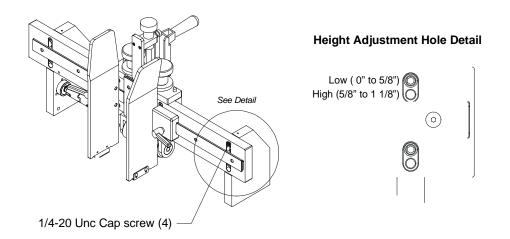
Feeder bridge assembly identifying the location of the four bridge mounting screws and the hole settings for a low and high height adjustment range.
